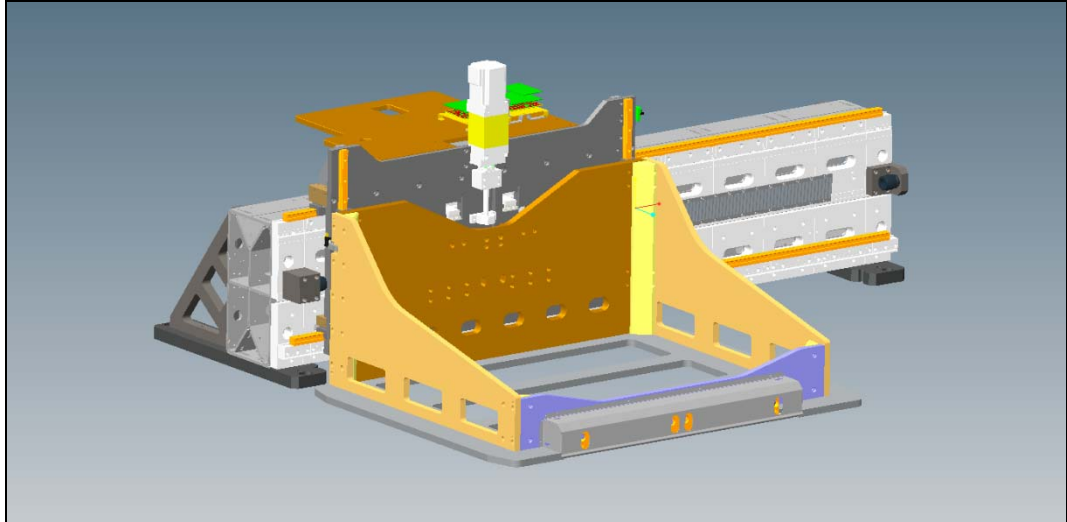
CAD drawing of the carriage and the support which holds the carriage
